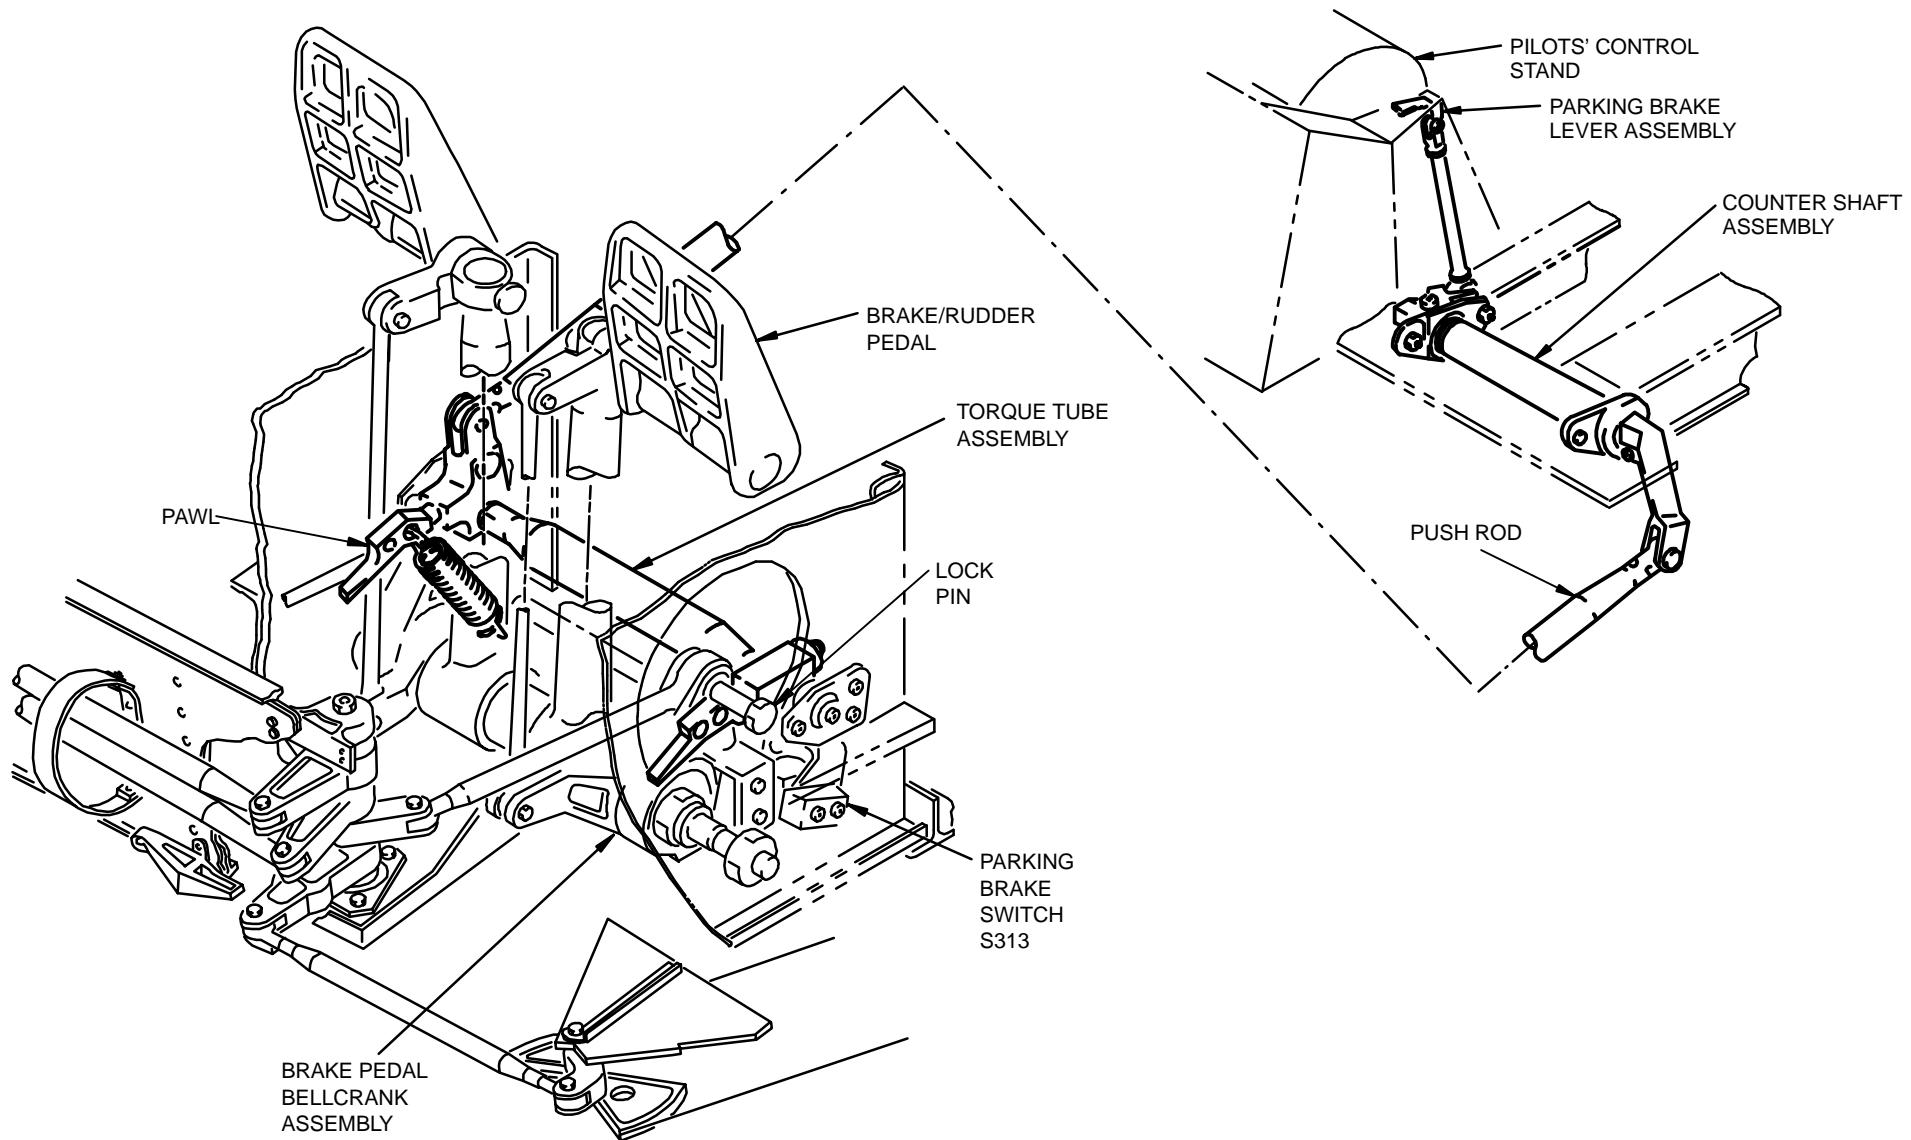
PARKING BRAKE SYSTEM COMPONENTS
